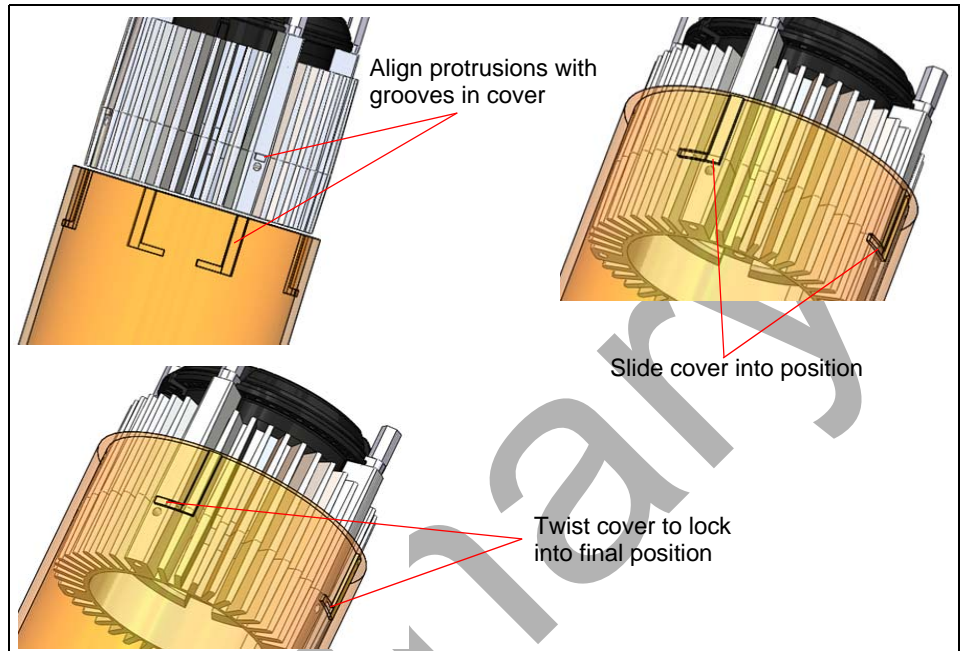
Attachment to the Center Perimeter Heat Sink Hole
